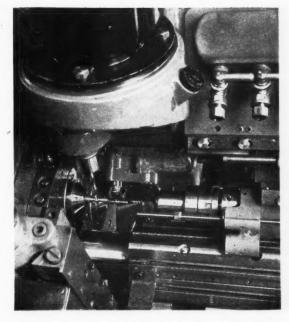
Production of a snap lock socket: cross-drilling and slot-milling heads.
